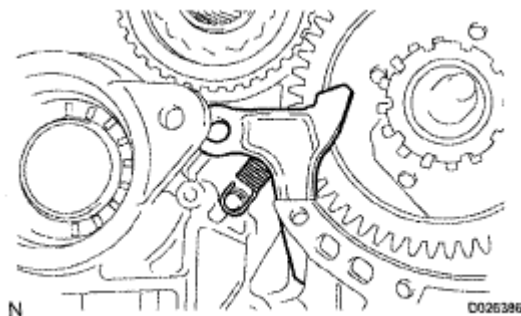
Identifying Spring, Pawl Pin And Parking Lock Pawl
